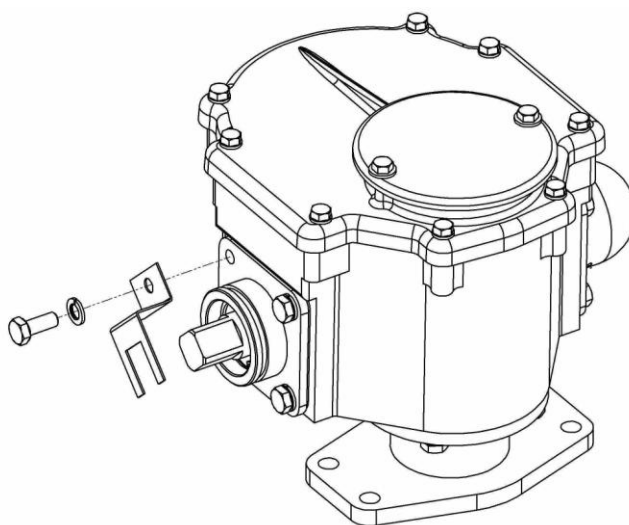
Transportation clamp of the incoming shaft of the worm gear box
